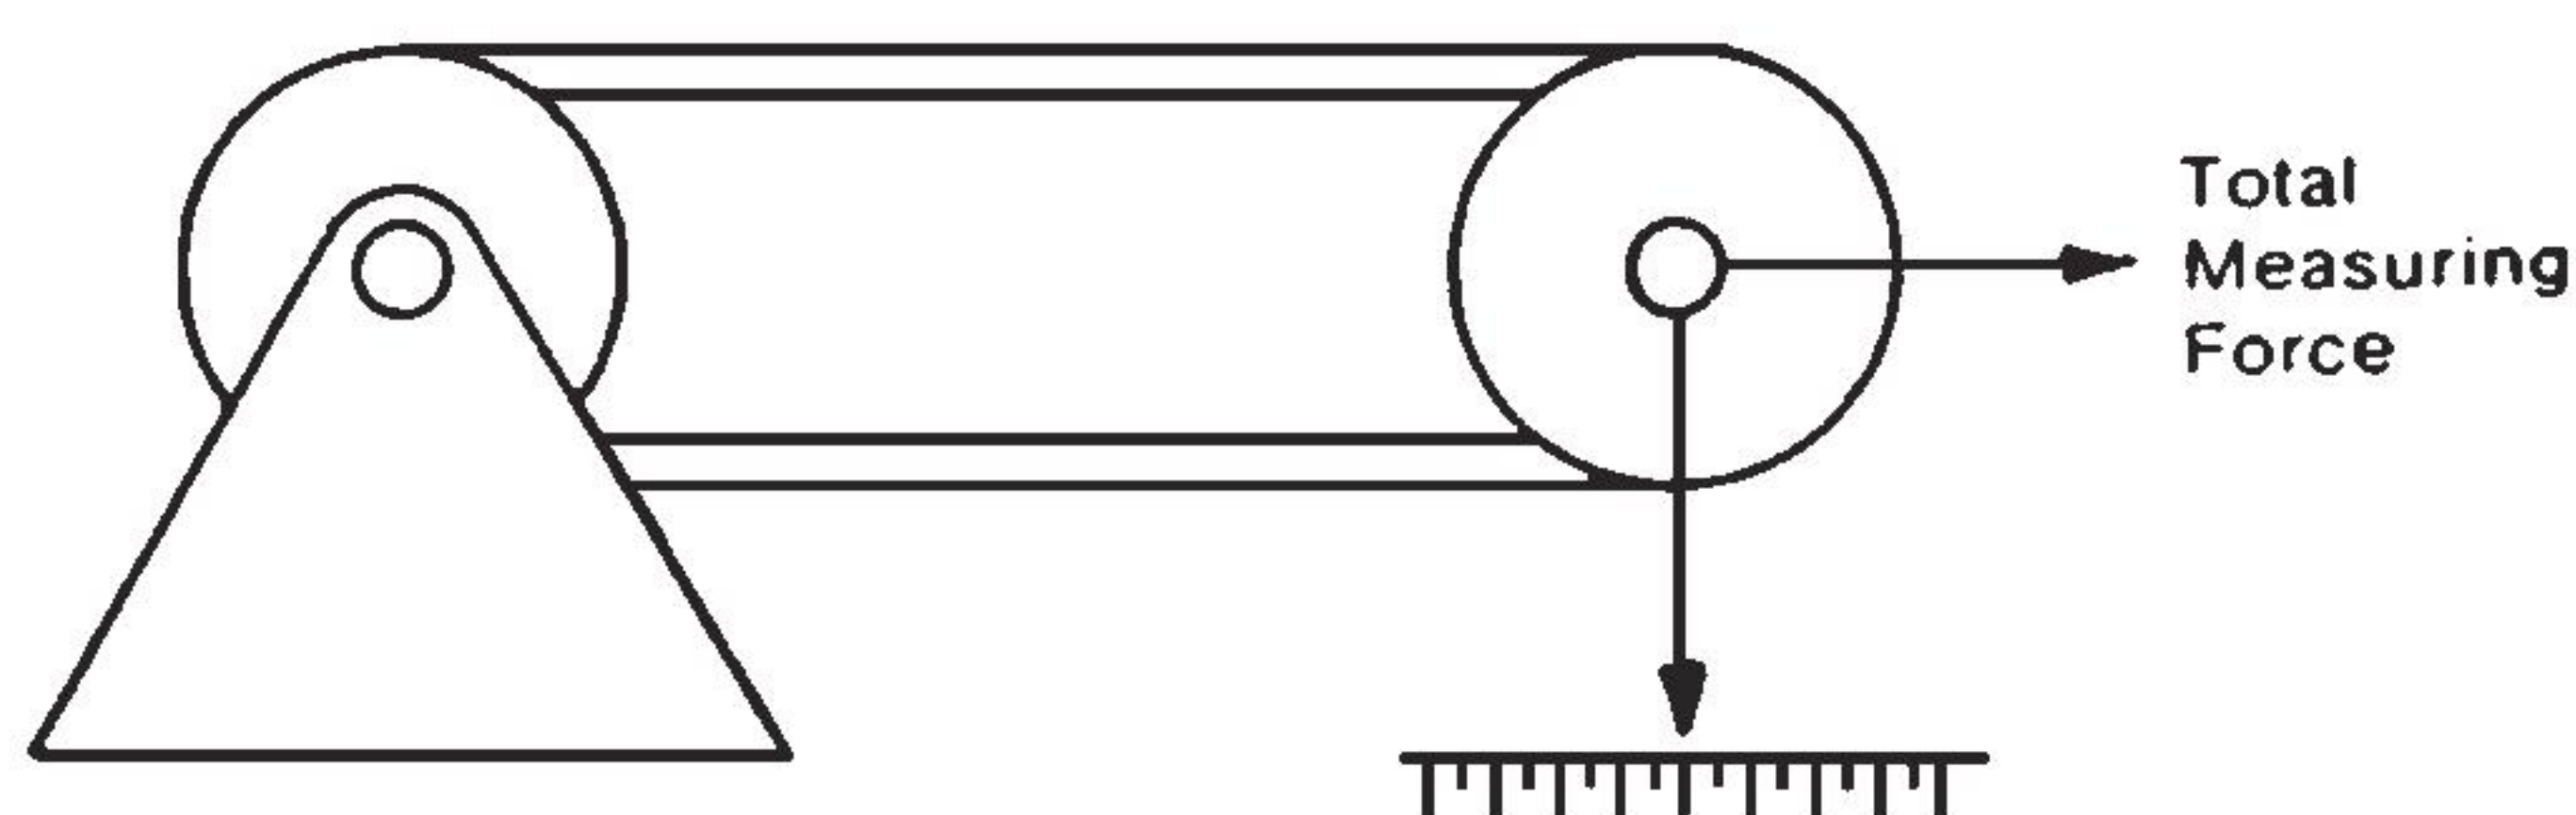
Schematic of a V-belt measuring fixture.
